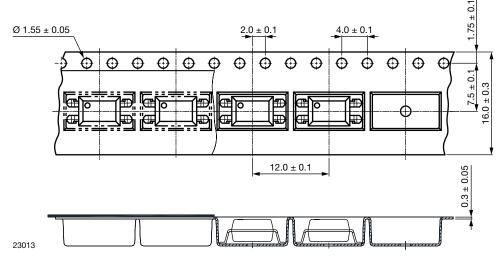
Tape and Reel Packaging (1000 pieces on reel)
